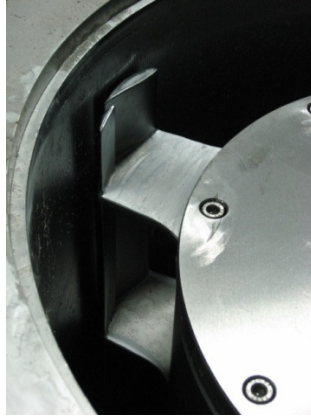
A photograph of the installed prototype AFT MEF™ Rotor following 23 days of continuous operation. There is no trace of stringing or wear.
